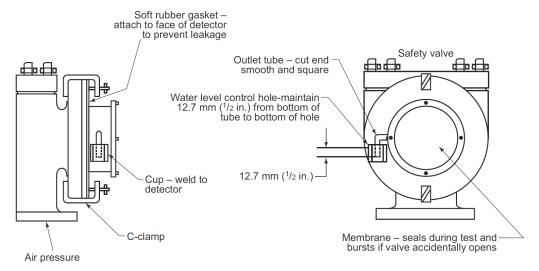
Device to Relieve Body Pressure Caused by Accidental Popping of the Valve
